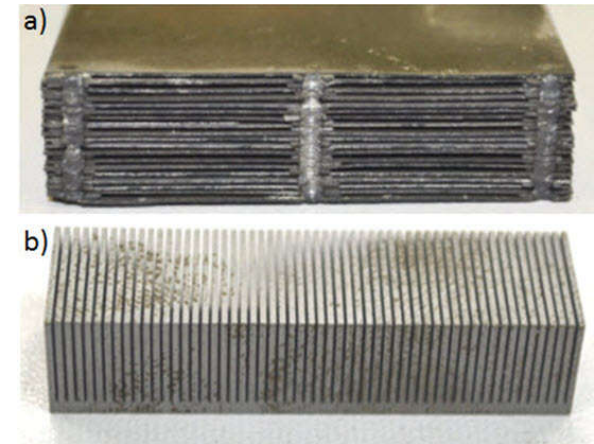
A photograph of: a) laser-welded La-Fe-Co-Si with a plate thickness of 0.25 mm and b) La-Fe-Co-Si block produced by wire EDM cutting.
